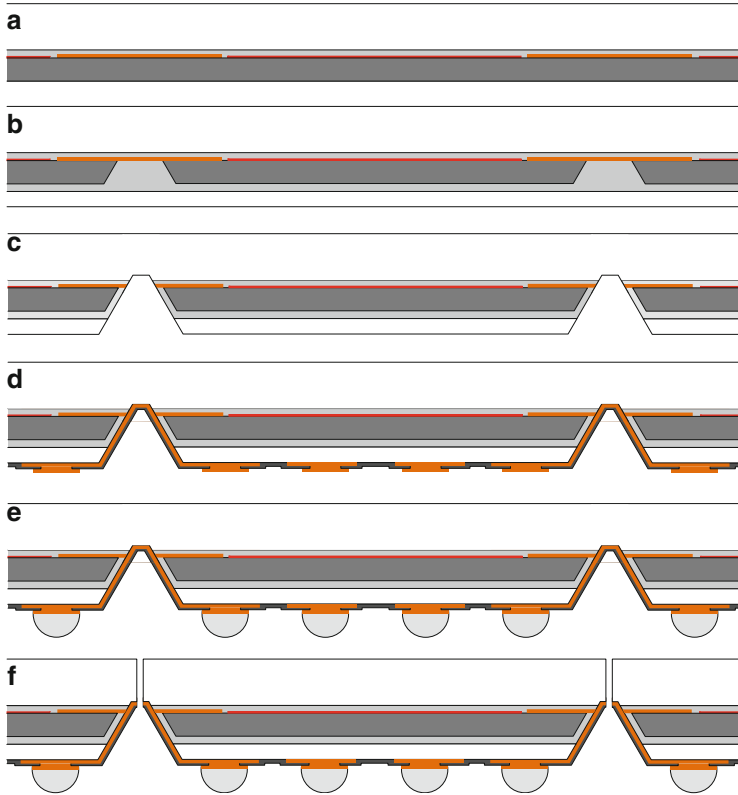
Schematic process flow of ShellOP: (a) bonding silicon to glass carrier and backgrind; (b) forming V trench and attaching bottom glass; (c) V cut through pad metal; (d) backside metallization and redistribution + UBM; (e) print solder or ball drop and reflow; (f) singulation
